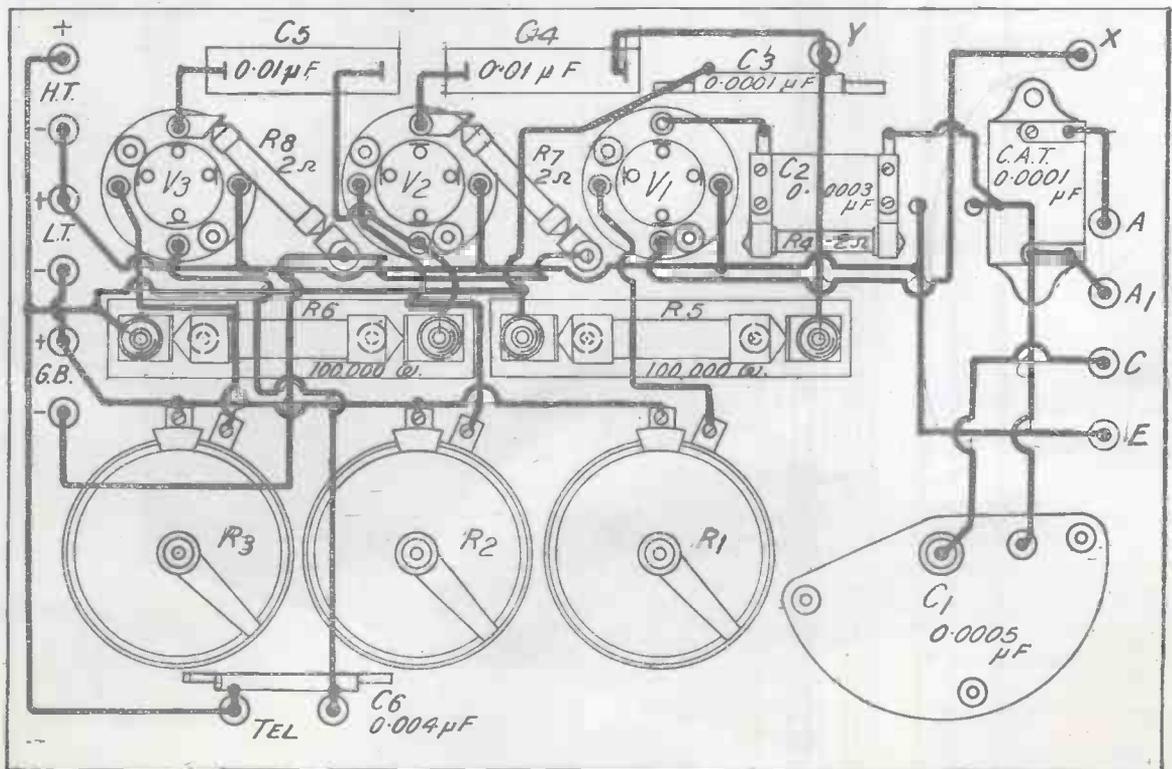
The wiring of the receiver. Blue print No. 63b.
